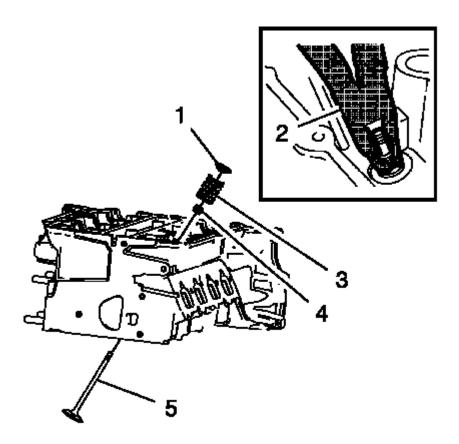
Valve Spring Retainer And Valve Spring Courtesy of GENERAL MOTORS COMPANY
